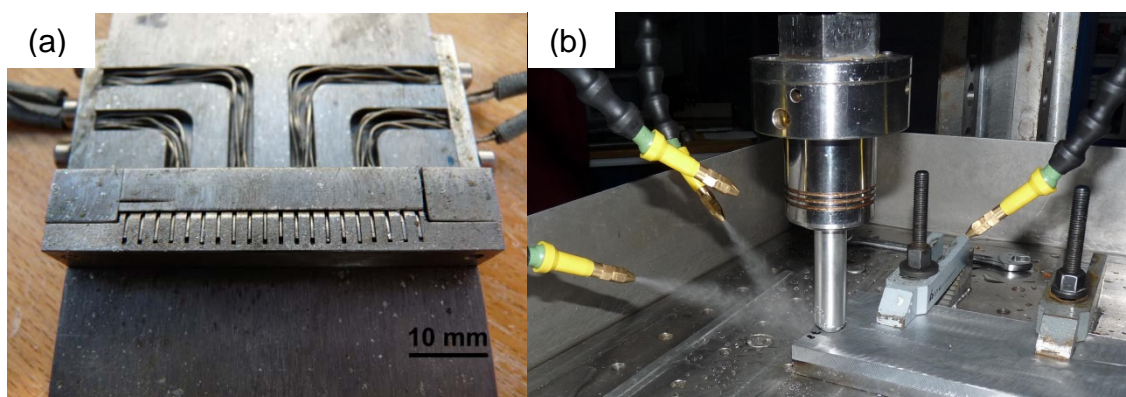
(a) Holder equipped with 20 thermocouples, (b) Arrangement of the nozzles
